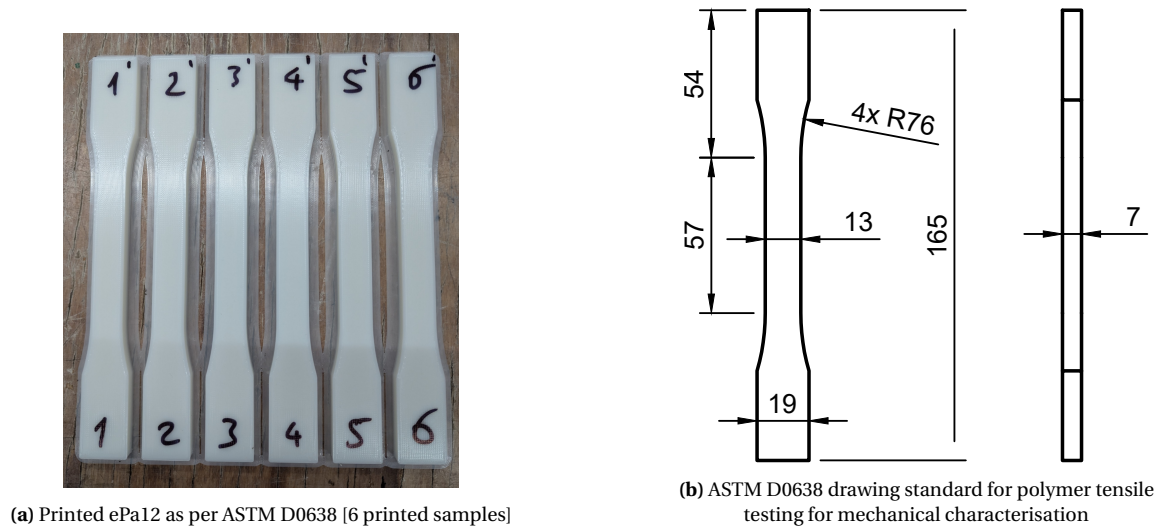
Printed samples and ASTM D0638 tensile testing standard
